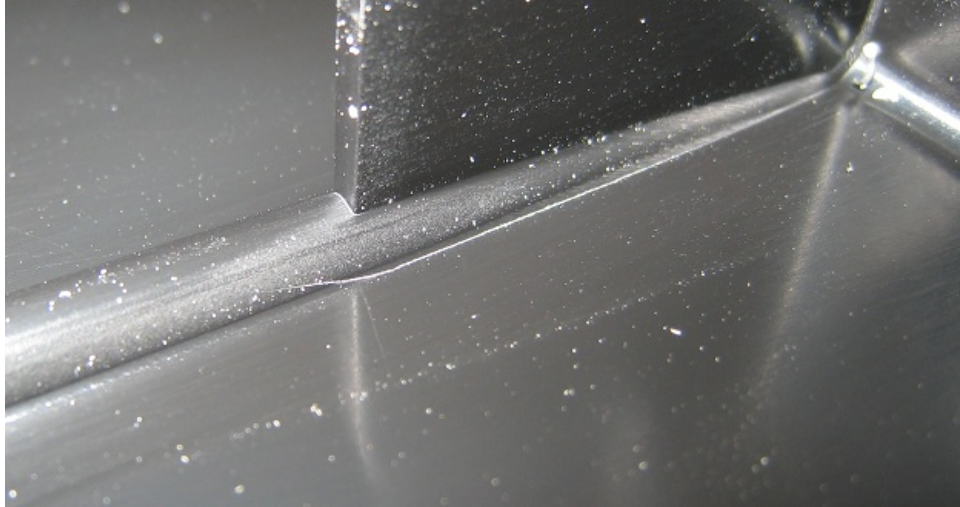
A medium sized crack occurring on the interface between Rib 3 and the inside surface of the manifold cover and progressing up onto Rib 3.
